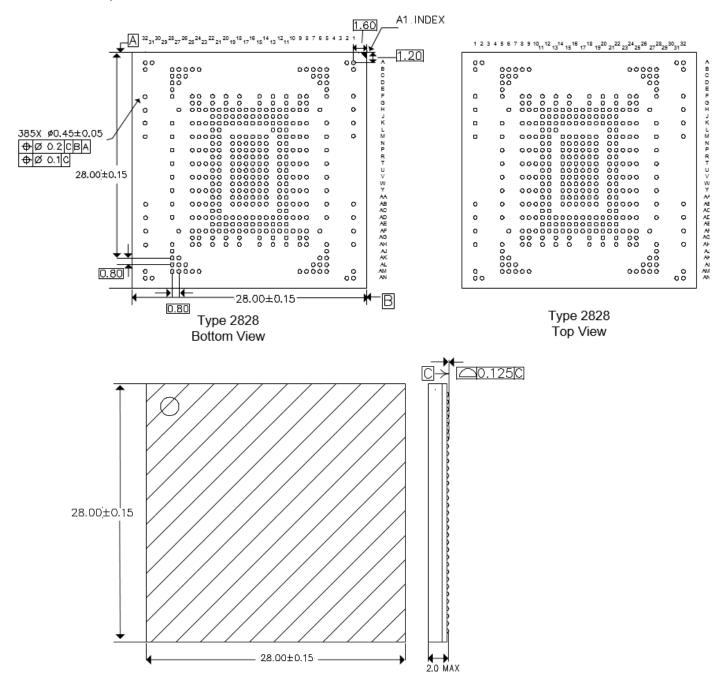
M.2 Type 2828-S5 Mechanical Outline Drawing Example
